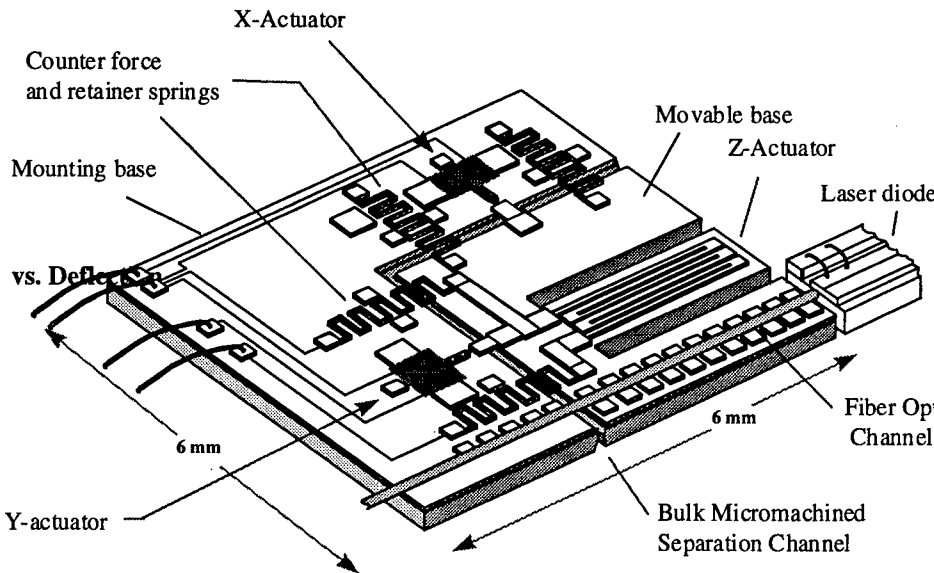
Mounted 3-axis in-package micro aligner (Design 3) actuation
